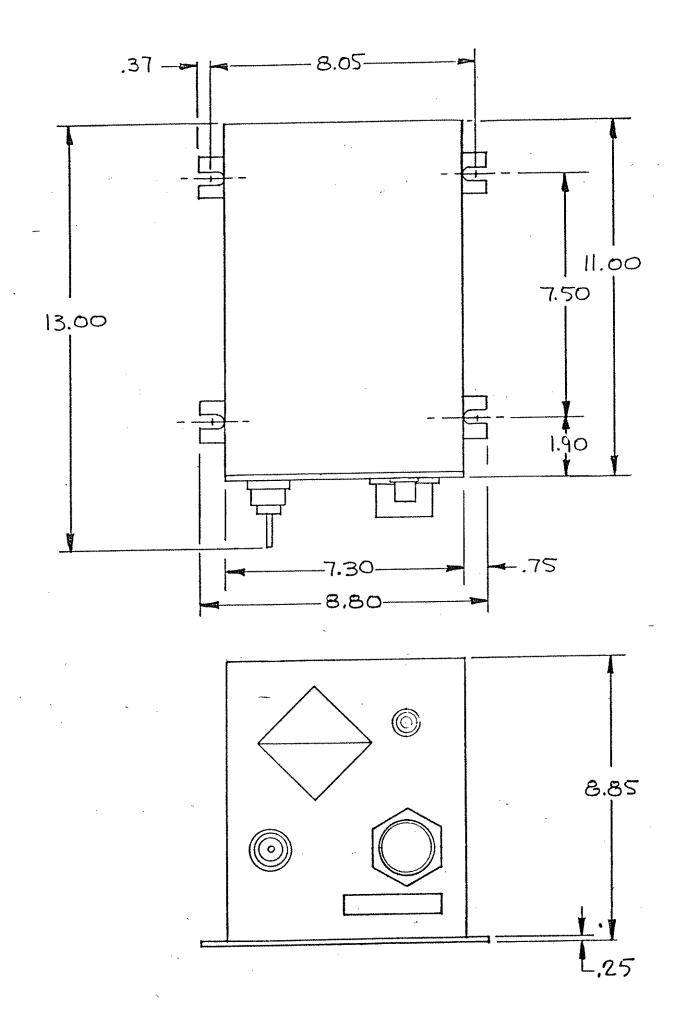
OUTLINE DIMENSIONS, SNR-601DAC
